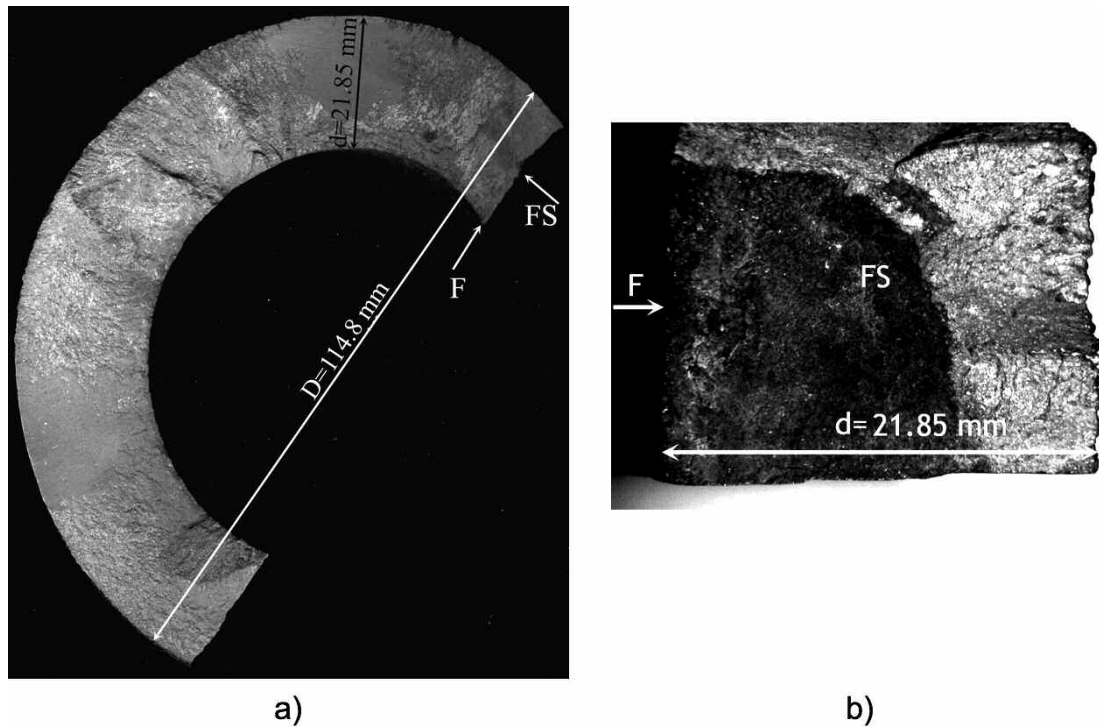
Fractured surface of the tube: a) cross section; b) longitudinal direction. F denotes the location of fracture and FS denotes fractured surface.
